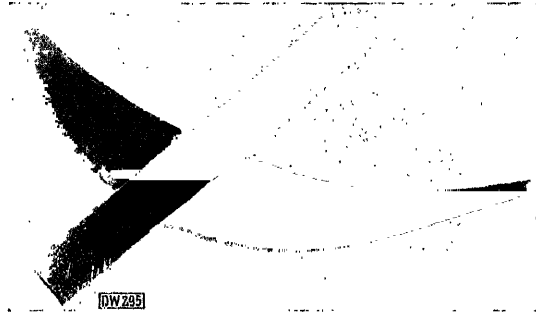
Monel Metal lacing wire soldered to stainless steel blade with silver solder. Microphotograph, about 1.5 times full size
